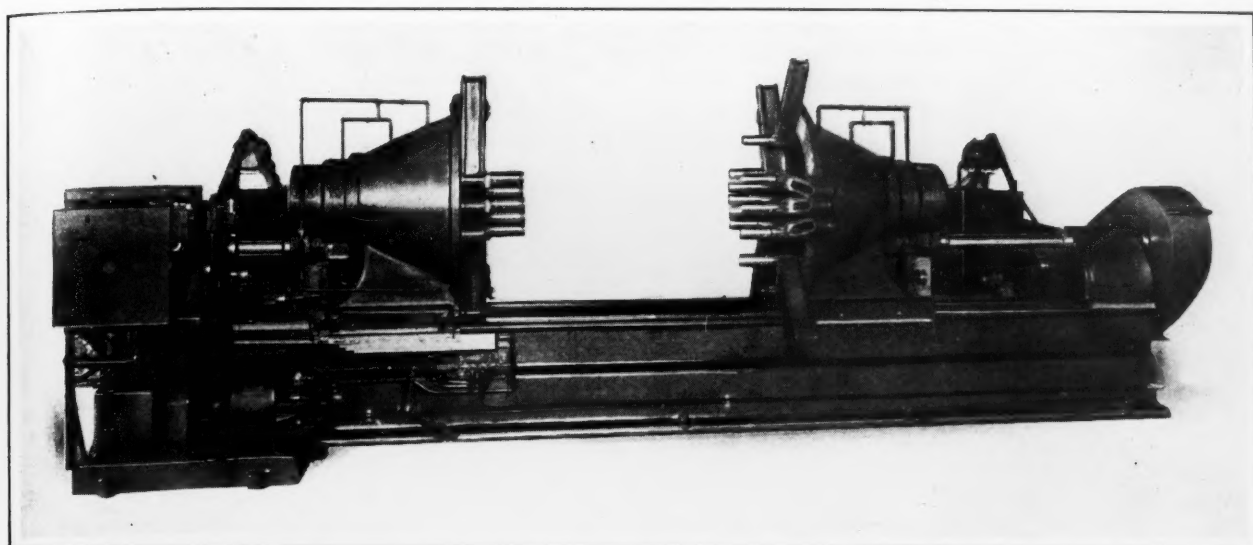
Harrington Opposed-head Multiple-spindle Drilling Machine Provided with Oilgear Equipment for Operating the Heads Automatically
